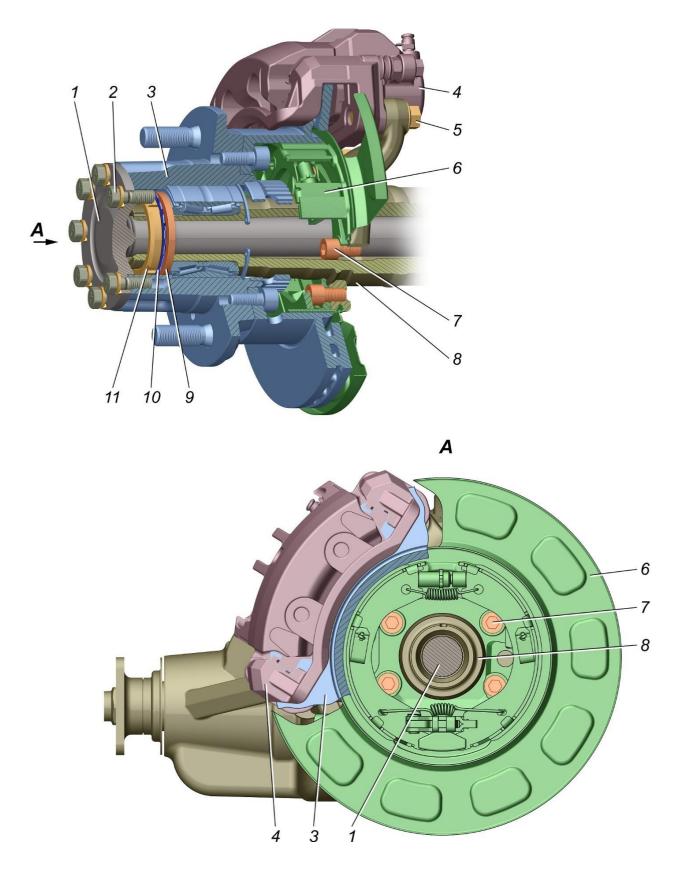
Rear axle (hub part) 1 - rear axle shaft; 2, 5 - bolts; 3 - rear wheel hub with brake disk and bearing; 4 - disk brake; 6 - parking brake; 7 - screws; 8 - axle casing; 9 - thrust washer; 10 - lock washer; 11 - slotted nut.
